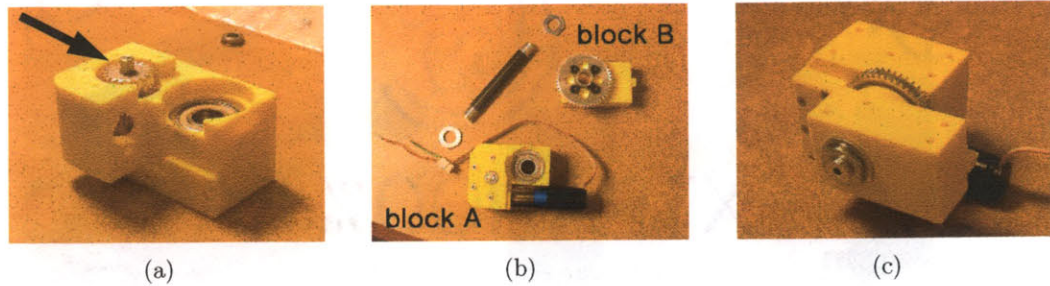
This figure shows the middle joint assembly. (a) The partial assembly of the block A. The intermediate gearing is indicated. (b) The assemblies of the block A and B are shown with the middle shaft. The motor is installed in the block A. (c) The completed middle joint assembly.
